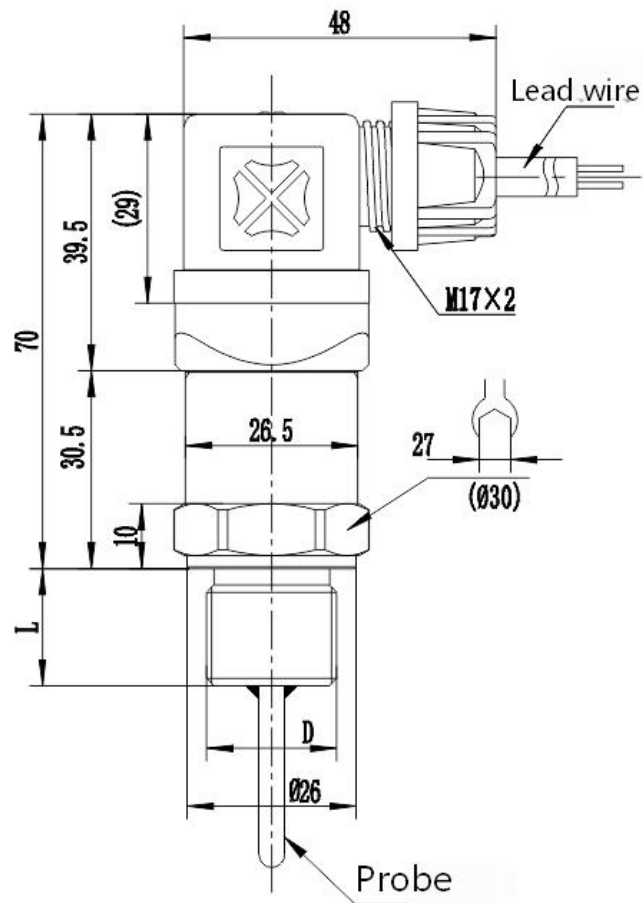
Dimensions of an integrated temperature transmitter (unit: mm)
